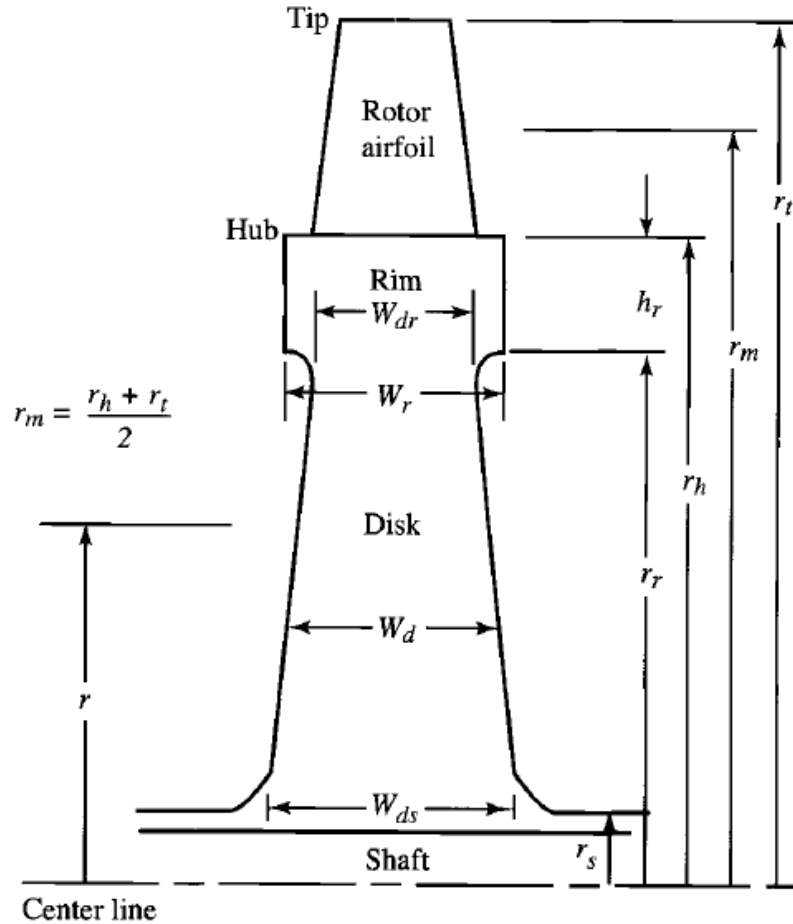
Geometry of Shaft, Disk, Rim, and Airfoil [6]
